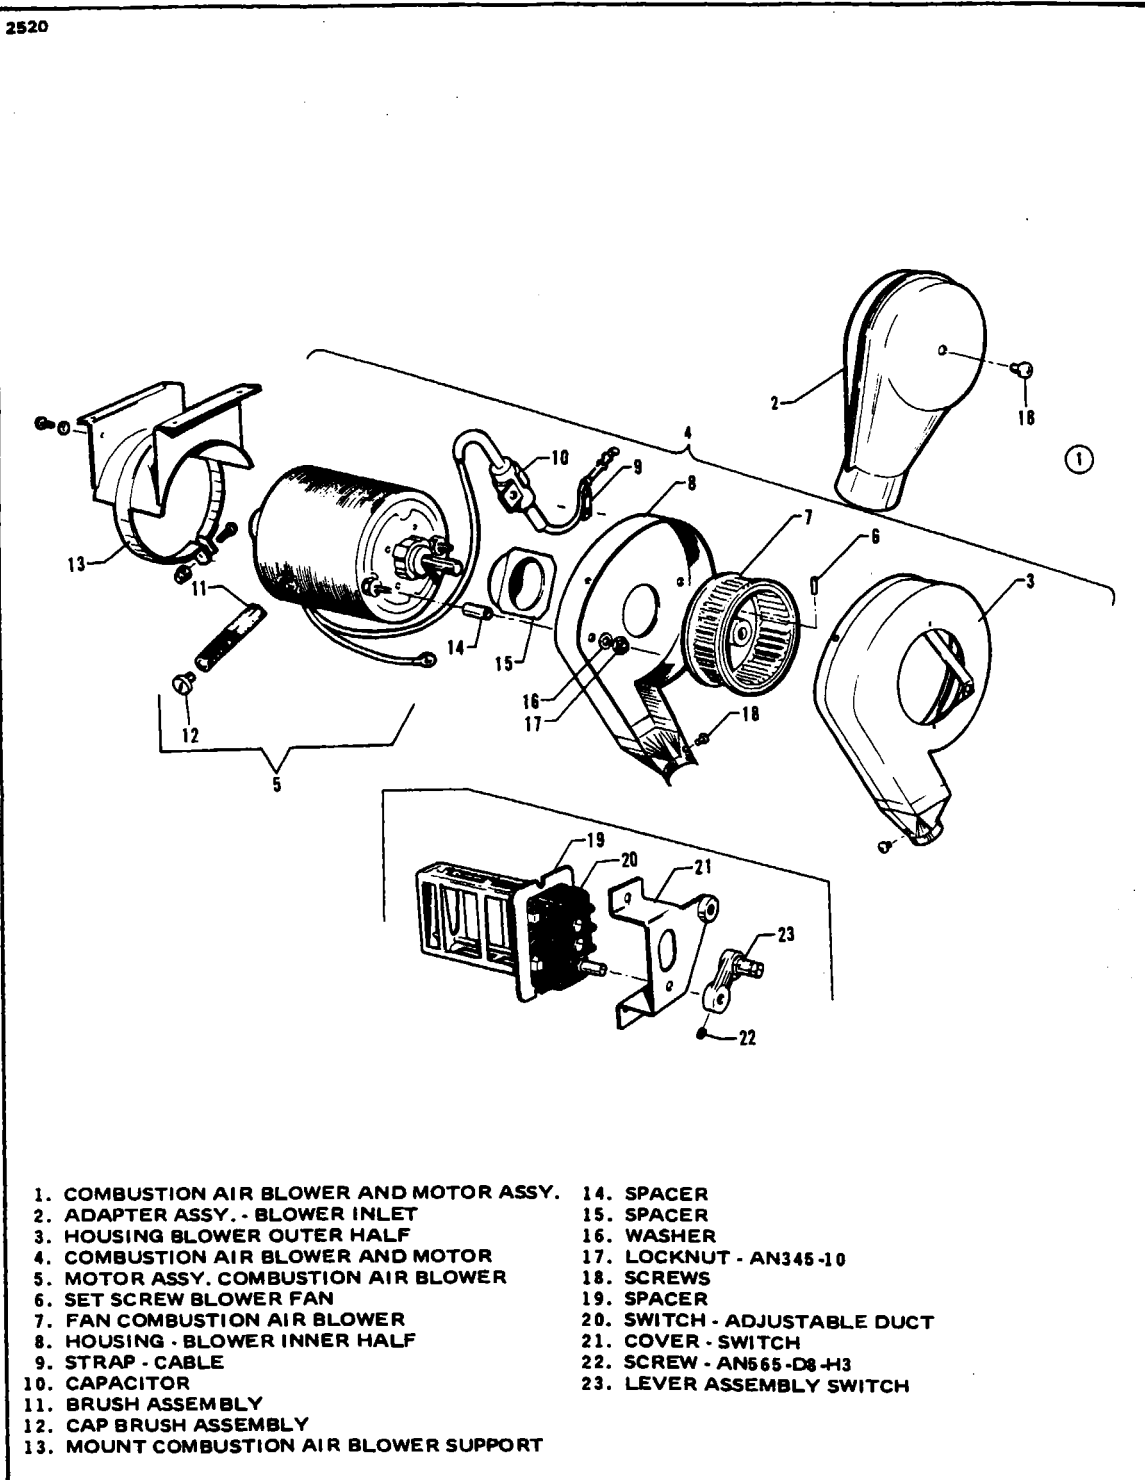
Exploded View of Combustion Air Blower and Motor Assembly No. 758 304
